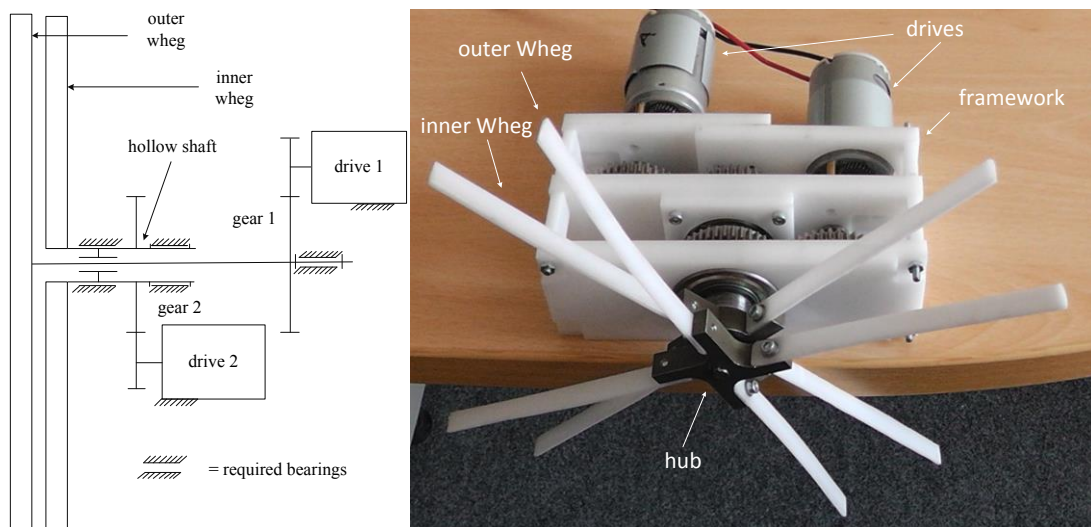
left: technical principle of the phase shifting double-wheg-module, right: assembled version
